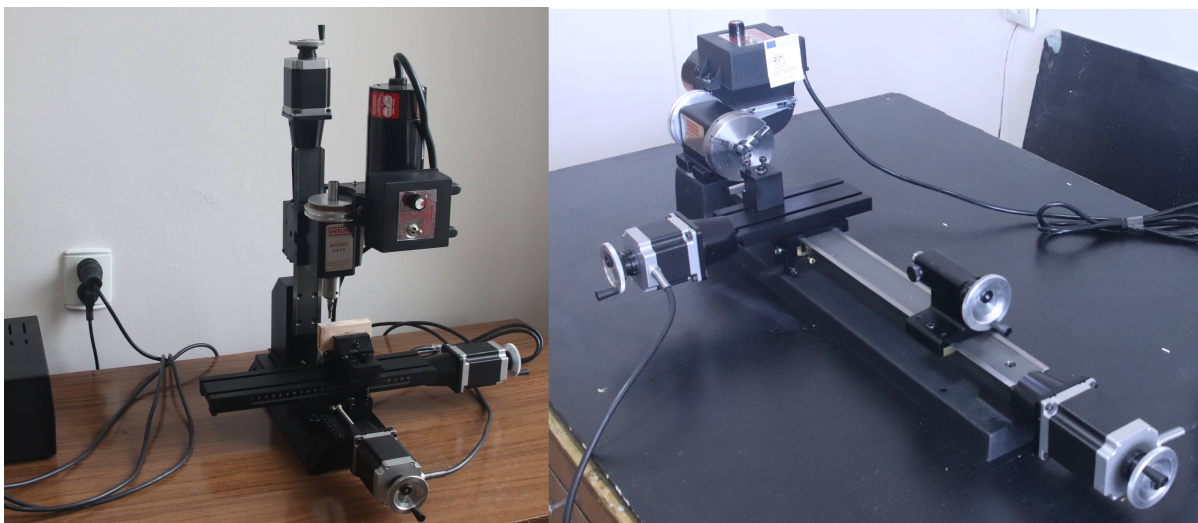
CNC machines: Sherline 5410 CNC and Sherline 4410 CNC.
